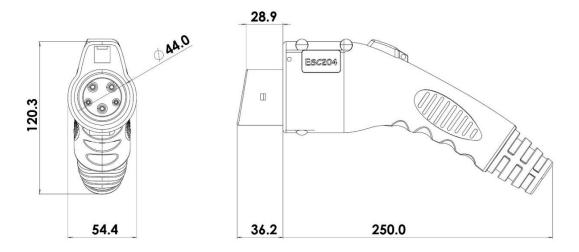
3D Printed Dummy Charger Plug without Alignment Tab (dimensions in mm, subject to 3D printing tolerances)
